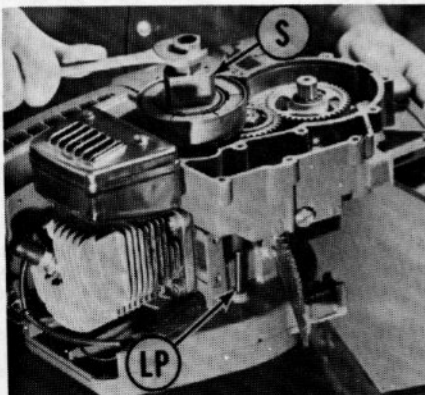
When removing clutch spider, use lock pin (LP) inserted as shown and turn clutch spider clockwise using a spanner wrench (S). Homelite number for spanner is A-23969.
